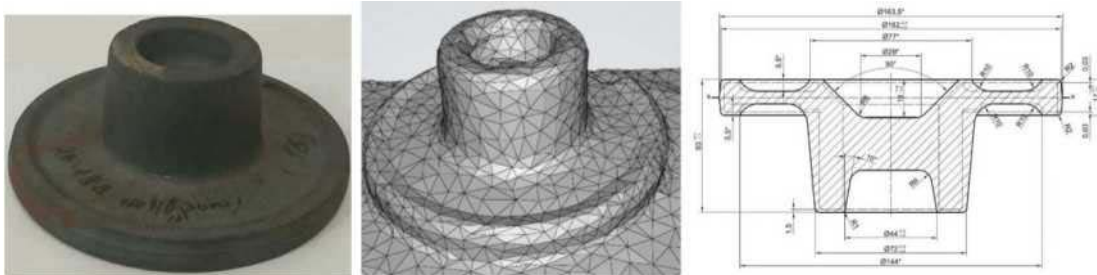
Real object gear stamping and scanned model on the basis of which a drawing of the forging is prepared. 3D
